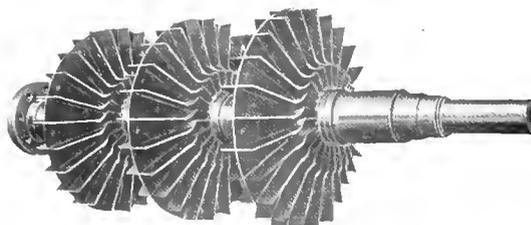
Rotating Element of Three-Stage Blast Furnace Compressor
